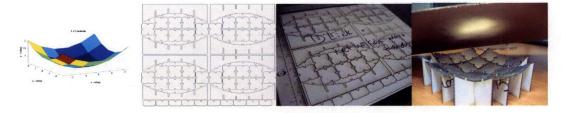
Slotted slide-assembly parabolic collector: software generated model, cut sheet, actual pieces, and assembled.
